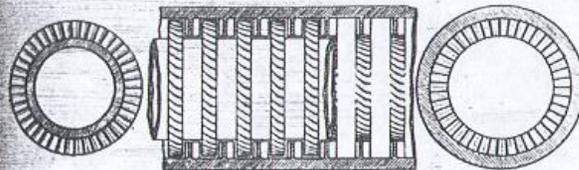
FORM OF BLADE IN THE PARSONS STEAM TURBINE.
